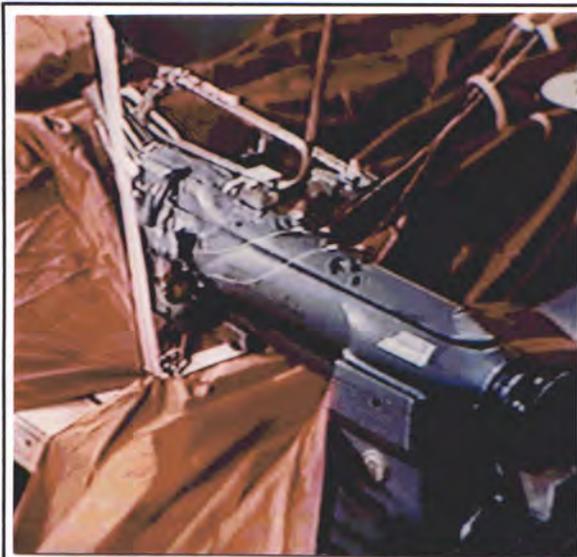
A top-reel tape feeder on a balloon factory sewing machine.
